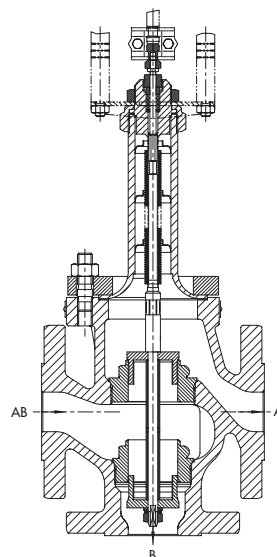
Type 3535 Three-way Valve for Heat Transfer Oil · Plug arrangement for diverting service
